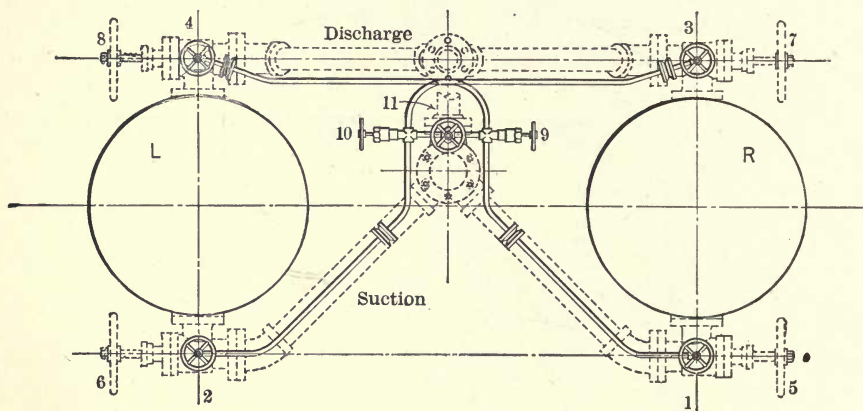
Frick Manipulating Valves for Large Compressors.
